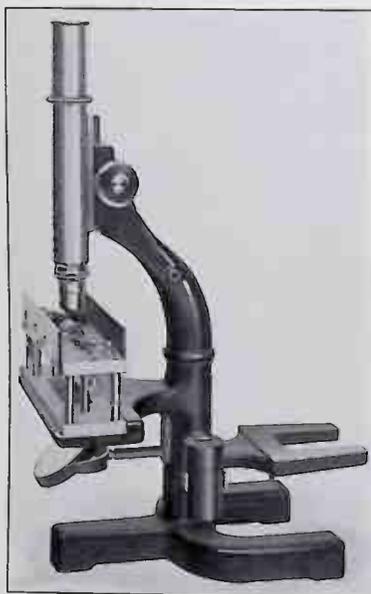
Illustrating a microscope fixture attached for visual examination of ribbon edges.
